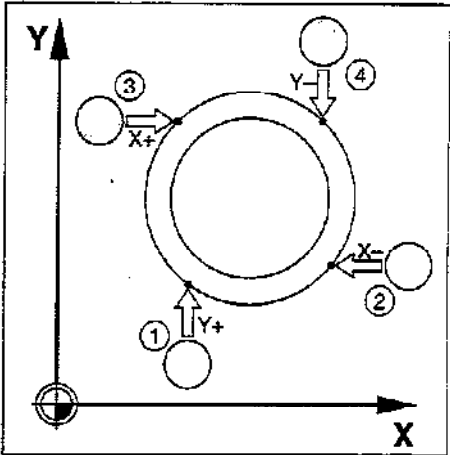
Probing the outside of a cylindrical surface to find the center
